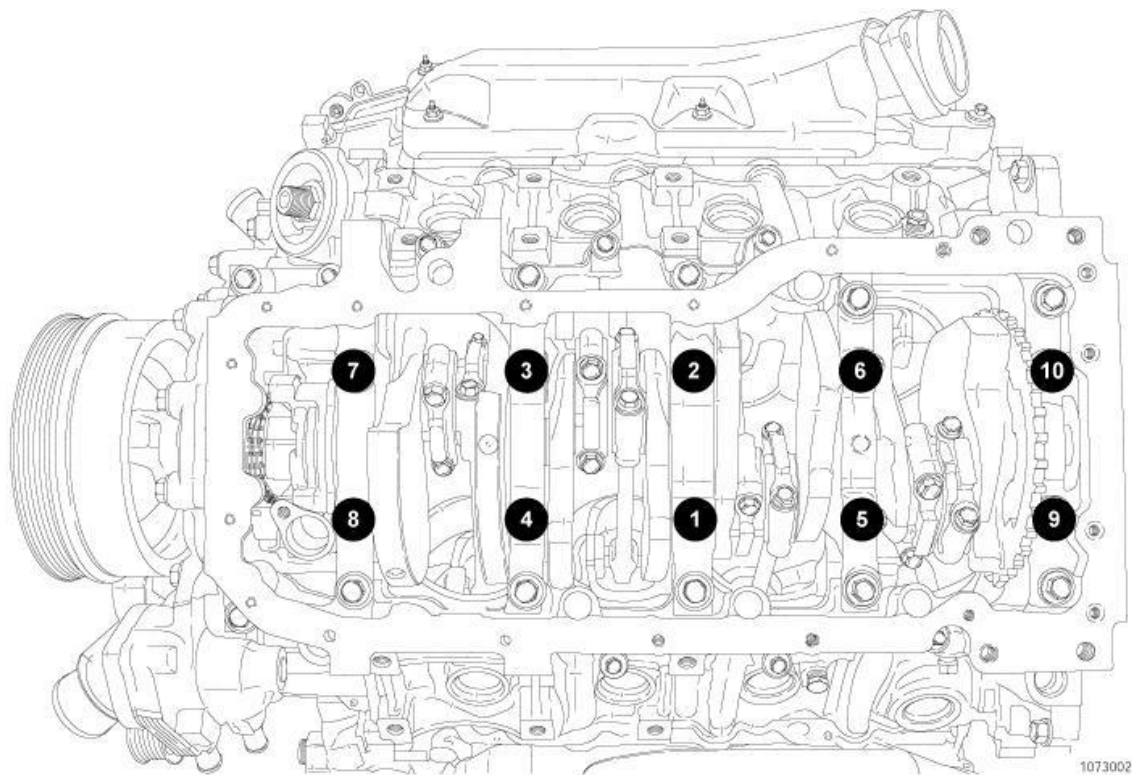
Tightening Bedplate Bolts (3 Of 4)
